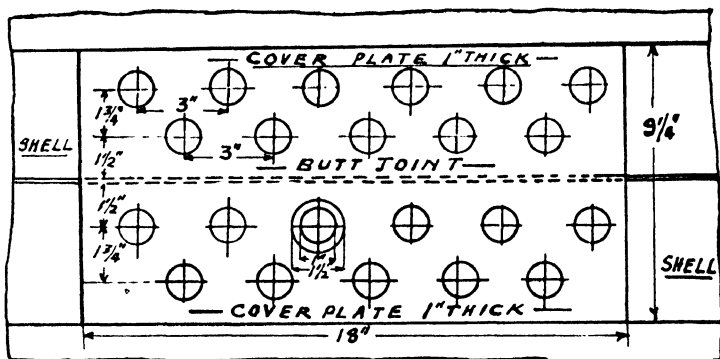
Plan of Butt Joint and Cover Plate for Lancashire Boiler.
